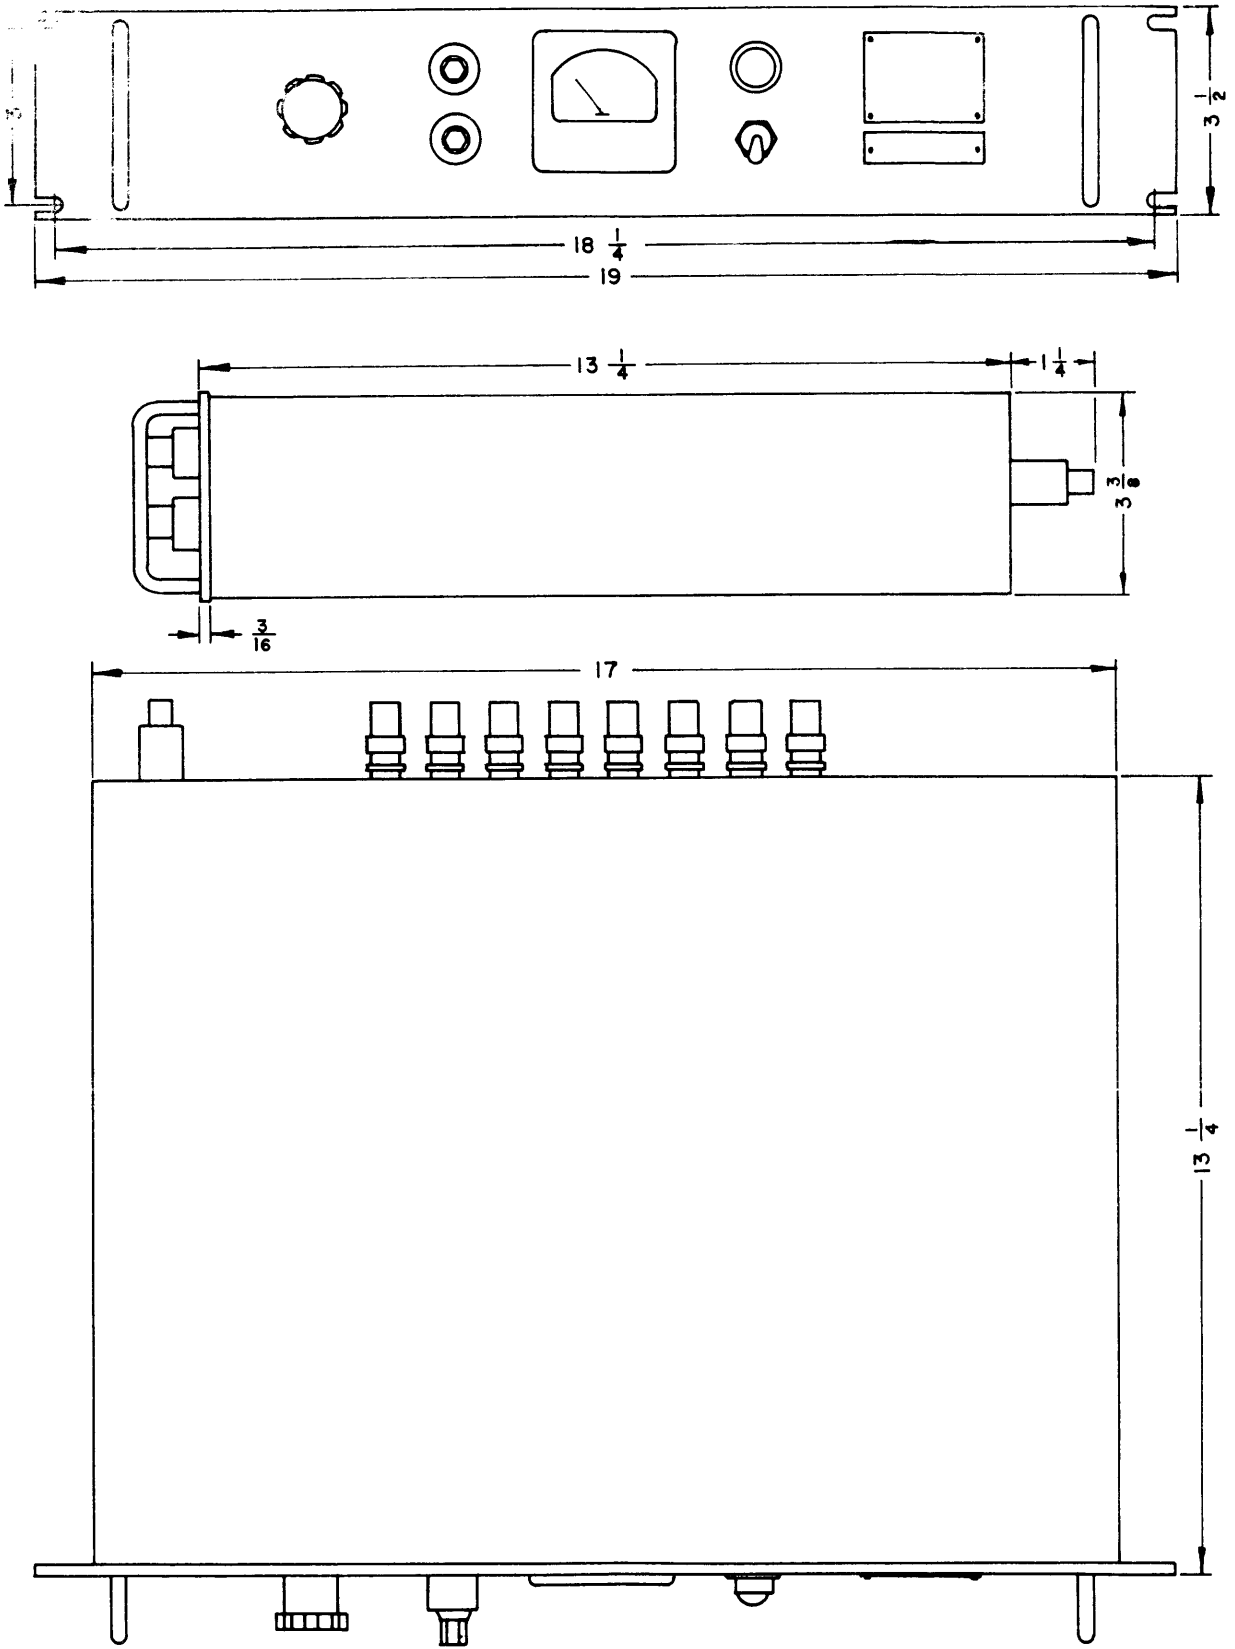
OUTLINE DIMENSION LMC-20
